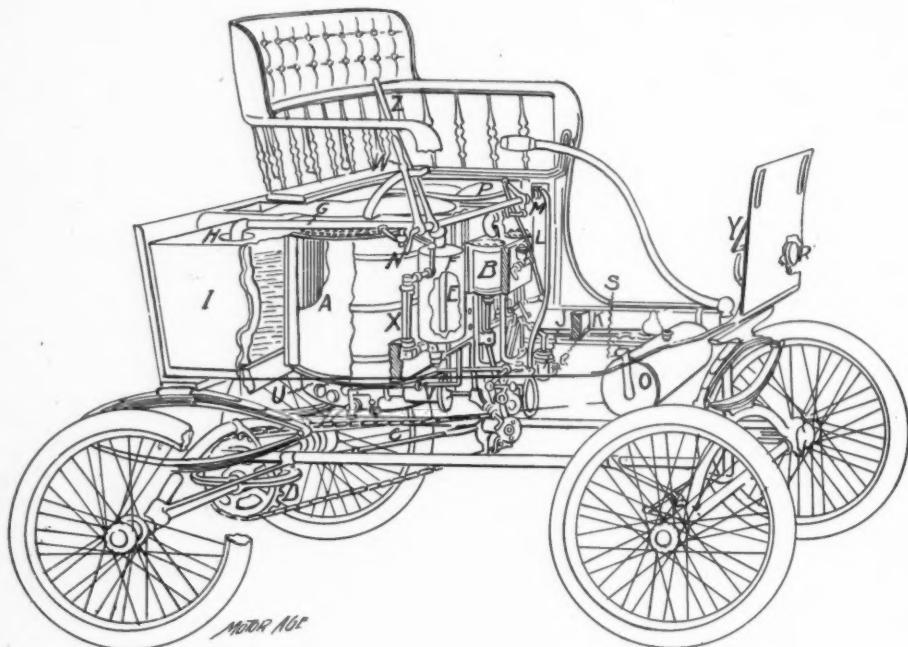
A STEAM RUNABOUT, SHOWING DETAILS OF THE MECHANISM.
